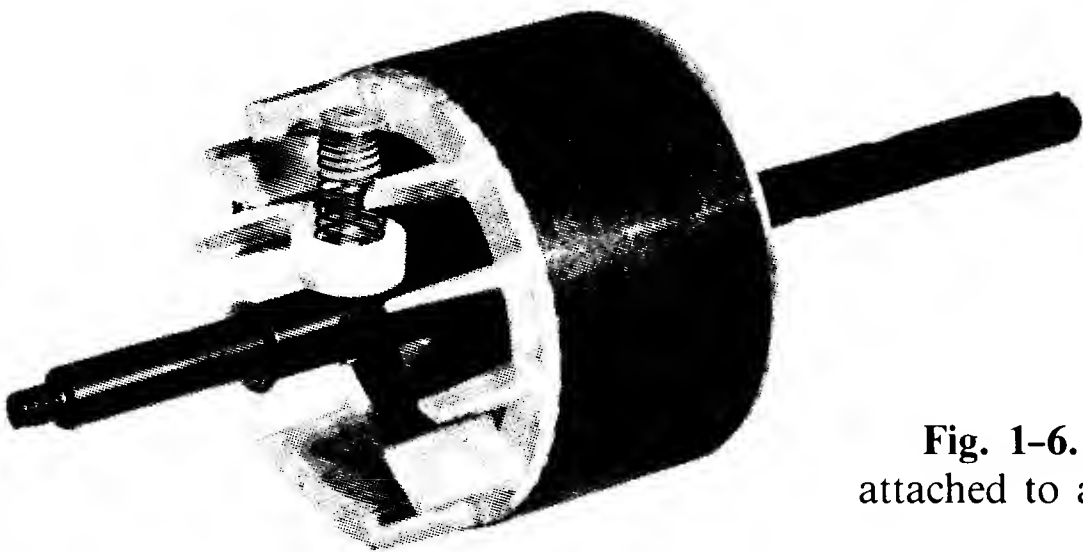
One type of rotating device attached to a rotor. (*Delco Products*)
